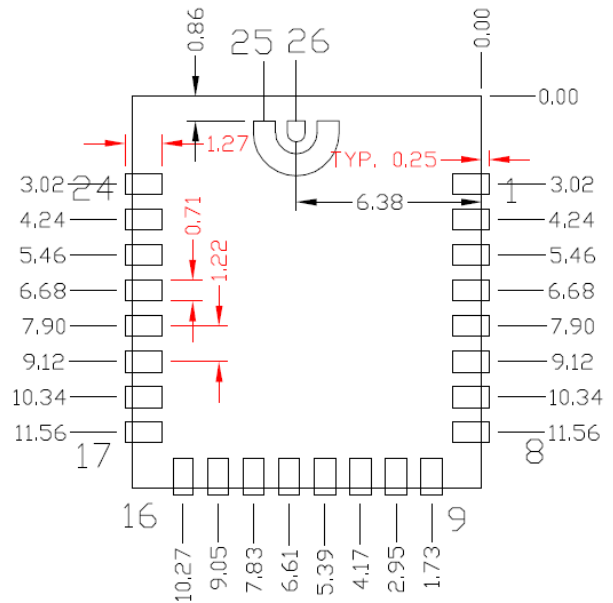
, Figure 5, Figure 6, and Table 3 provide details that can be used for the recommended host PCB layout pattern for the CYBT-3330xx-02. Dimensions are in millimeters unless otherwise noted. Pad length of 1.27 mm (0.635 mm from center of the pad on either side) shown in Figure 6 is the minimum recommended host pad length. The host PCB layout pattern can be completed using either Figure 4, Figure 5, or Figure 6. It is not necessary to use all figures to complete the host PCB layout pattern.
